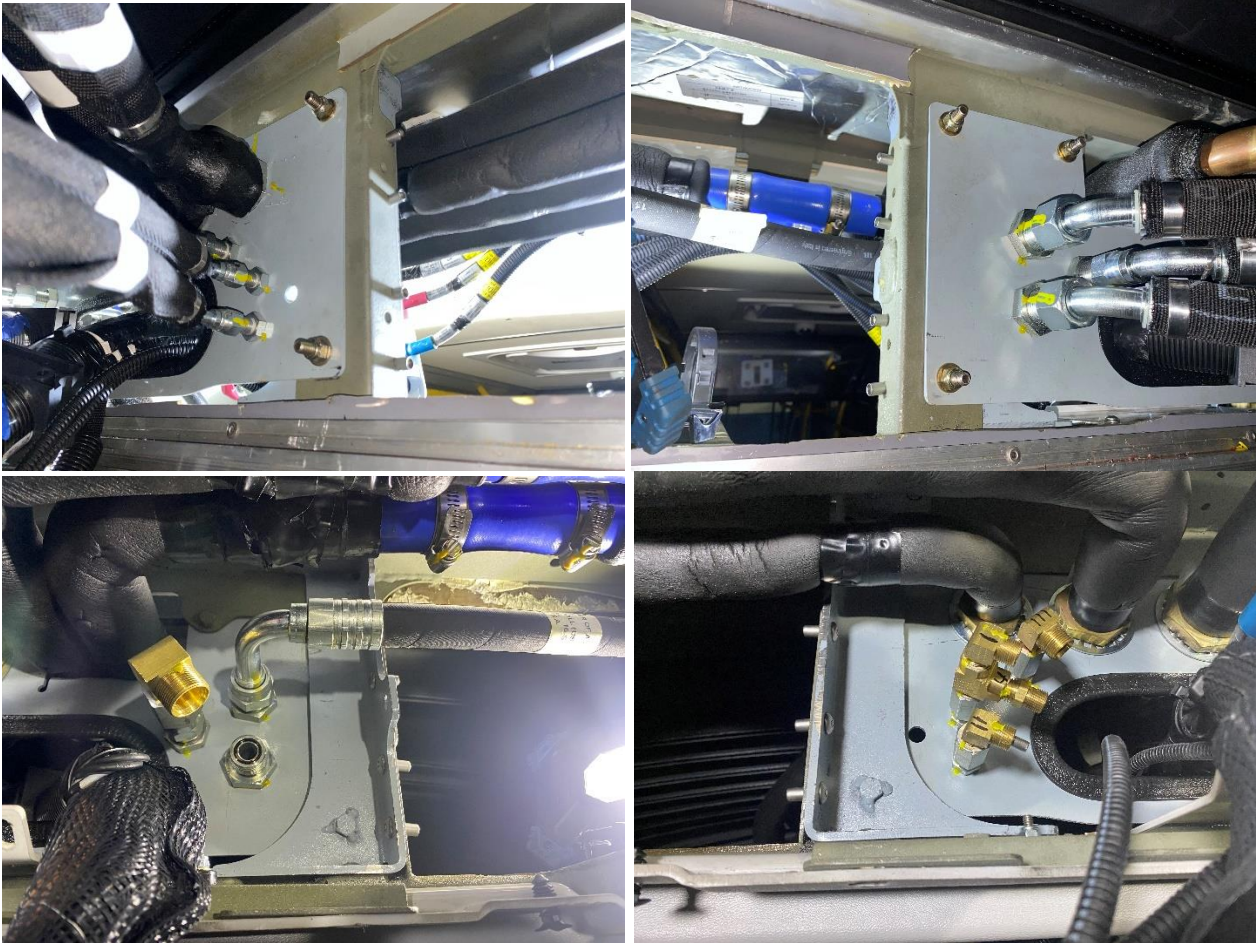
B: VIEW OF BRACKETS INSTALLED WITH RIVETS
